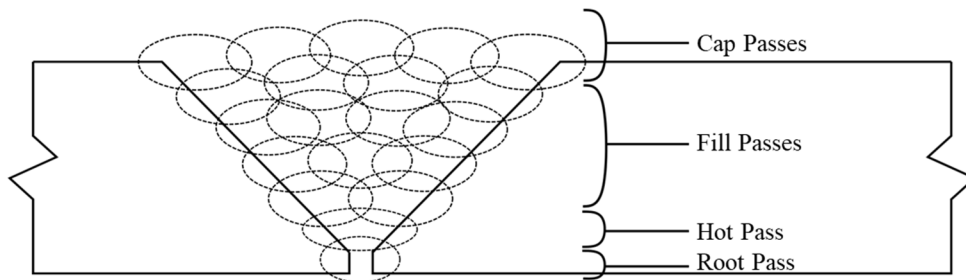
Single-V groove geometry with multi-pass weld terminology highlighted
